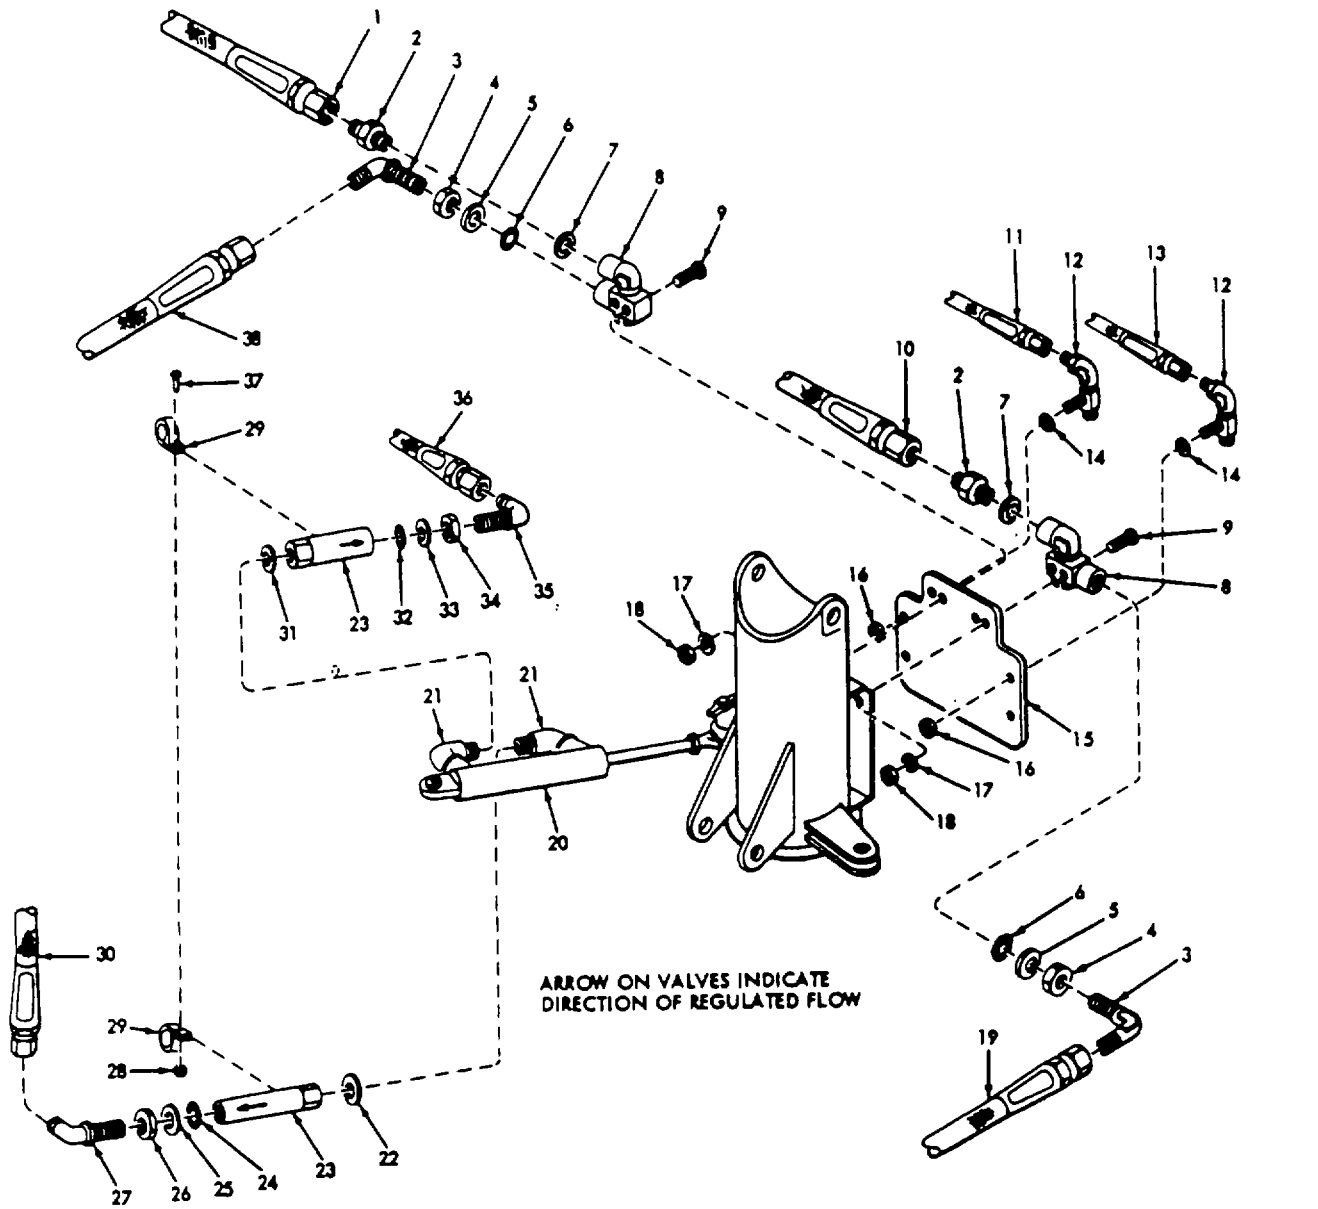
Extension Cylinder - Flow Regulator Valve Removal.
